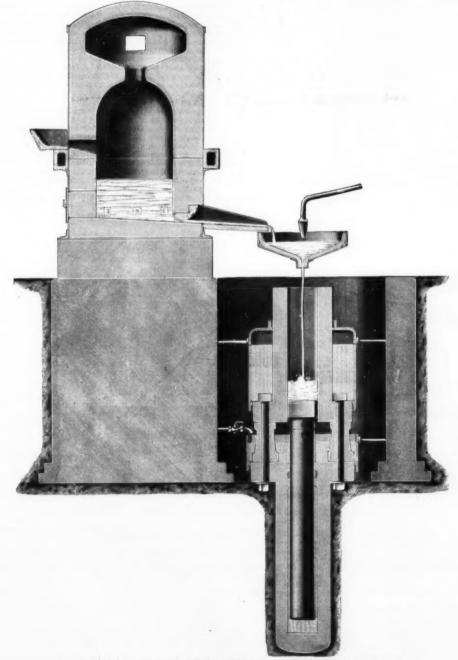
CONVERTER AND HYDRAULIC CASTING APPARATUS, 1856.
